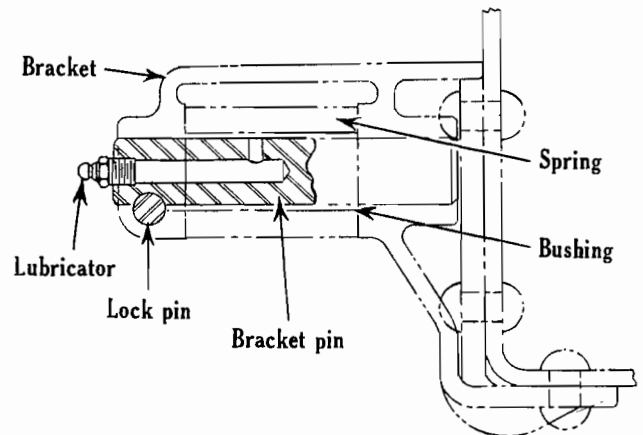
Rear Spring Front Bracket For Models L-160, L-163, L-164, L-165, LC-160, L-170, L-173, L-174, L-175.
